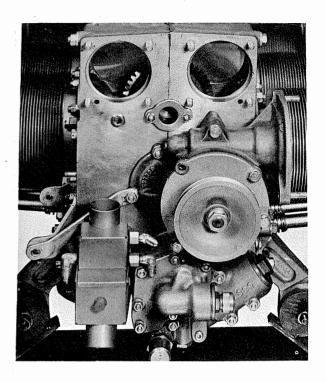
Fuel Pump, Oil Pump and Starter Adapter Installed.
